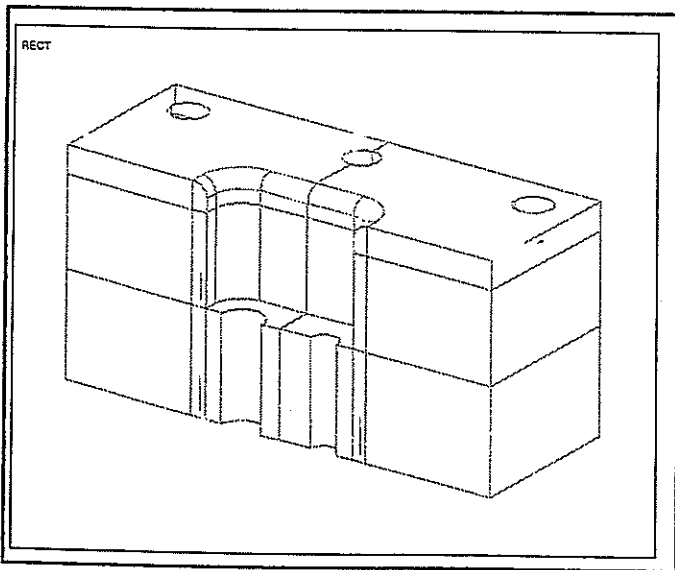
Miniblock Tooling - Rectangular Shape Isometric View
